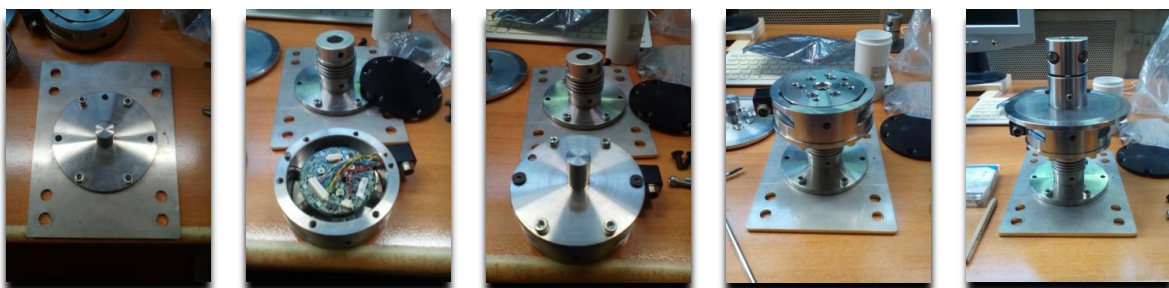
Assembly steps of the model supporting system on one side. The elastic device of coupling is fixed on the plate, while the force balance is equipped with a special adapter. Finally, a clamp, which can rotate, is connected to the balance.
